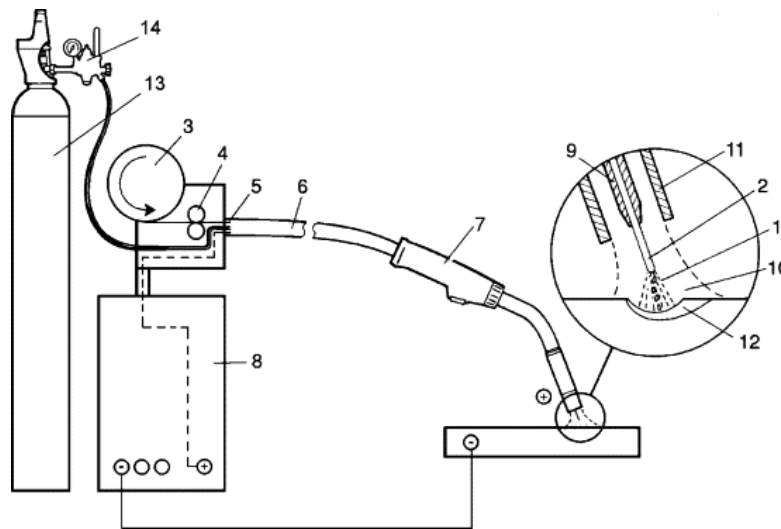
The working principle of MIG welding. 1. Electric Arc. 2. Electrode. 10. Shielding Gas. 11. Shielding Gas Nozzle [39]
